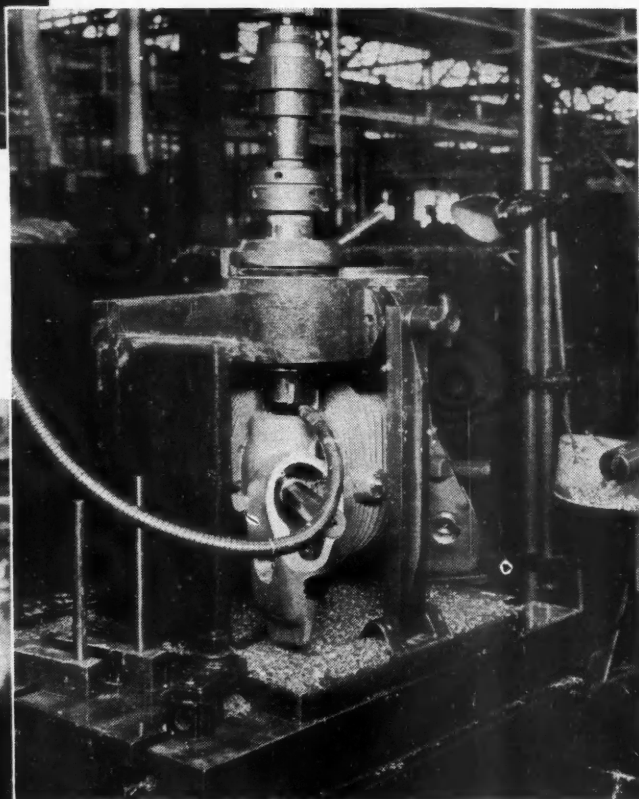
(Above) Carlton Radial drilling machine rigged with a fixed center type of fixture. Operations performed with the set-up are: boring, facing, reaming and tapping of cylinder port holes. Location of work for center distance is from the outside of the lower flange which is held within plus or minus 0.0005 in. for the purpose. Plugs placed in valve guide holes and fitted into a central slot in the back of the fixture provide positive angular location. Work is held rigidly against the back of the fixture by the substantial hinged strap shown in the front. For the tapping operation a lead screw is provided on the tool bar.
